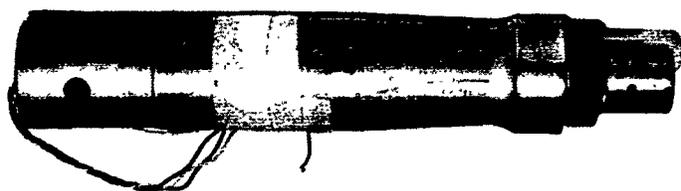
FORWARD INSTRUMENTED AXLE ASSEMBLY - STOW SYSTEM SIDE VIEW .
